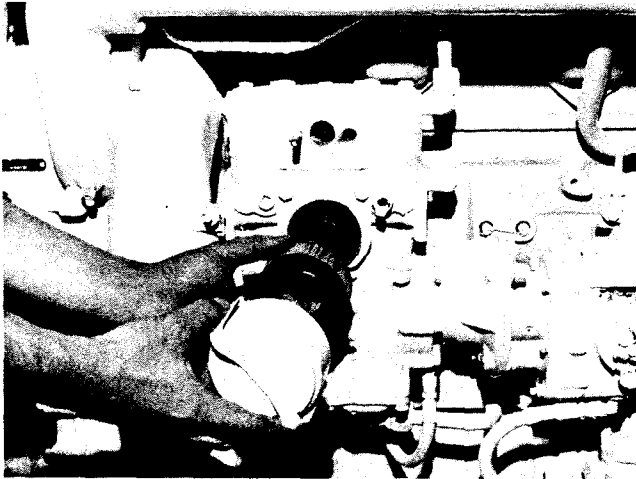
, (V41420). Bendix-Westinghouse air compressor breather
